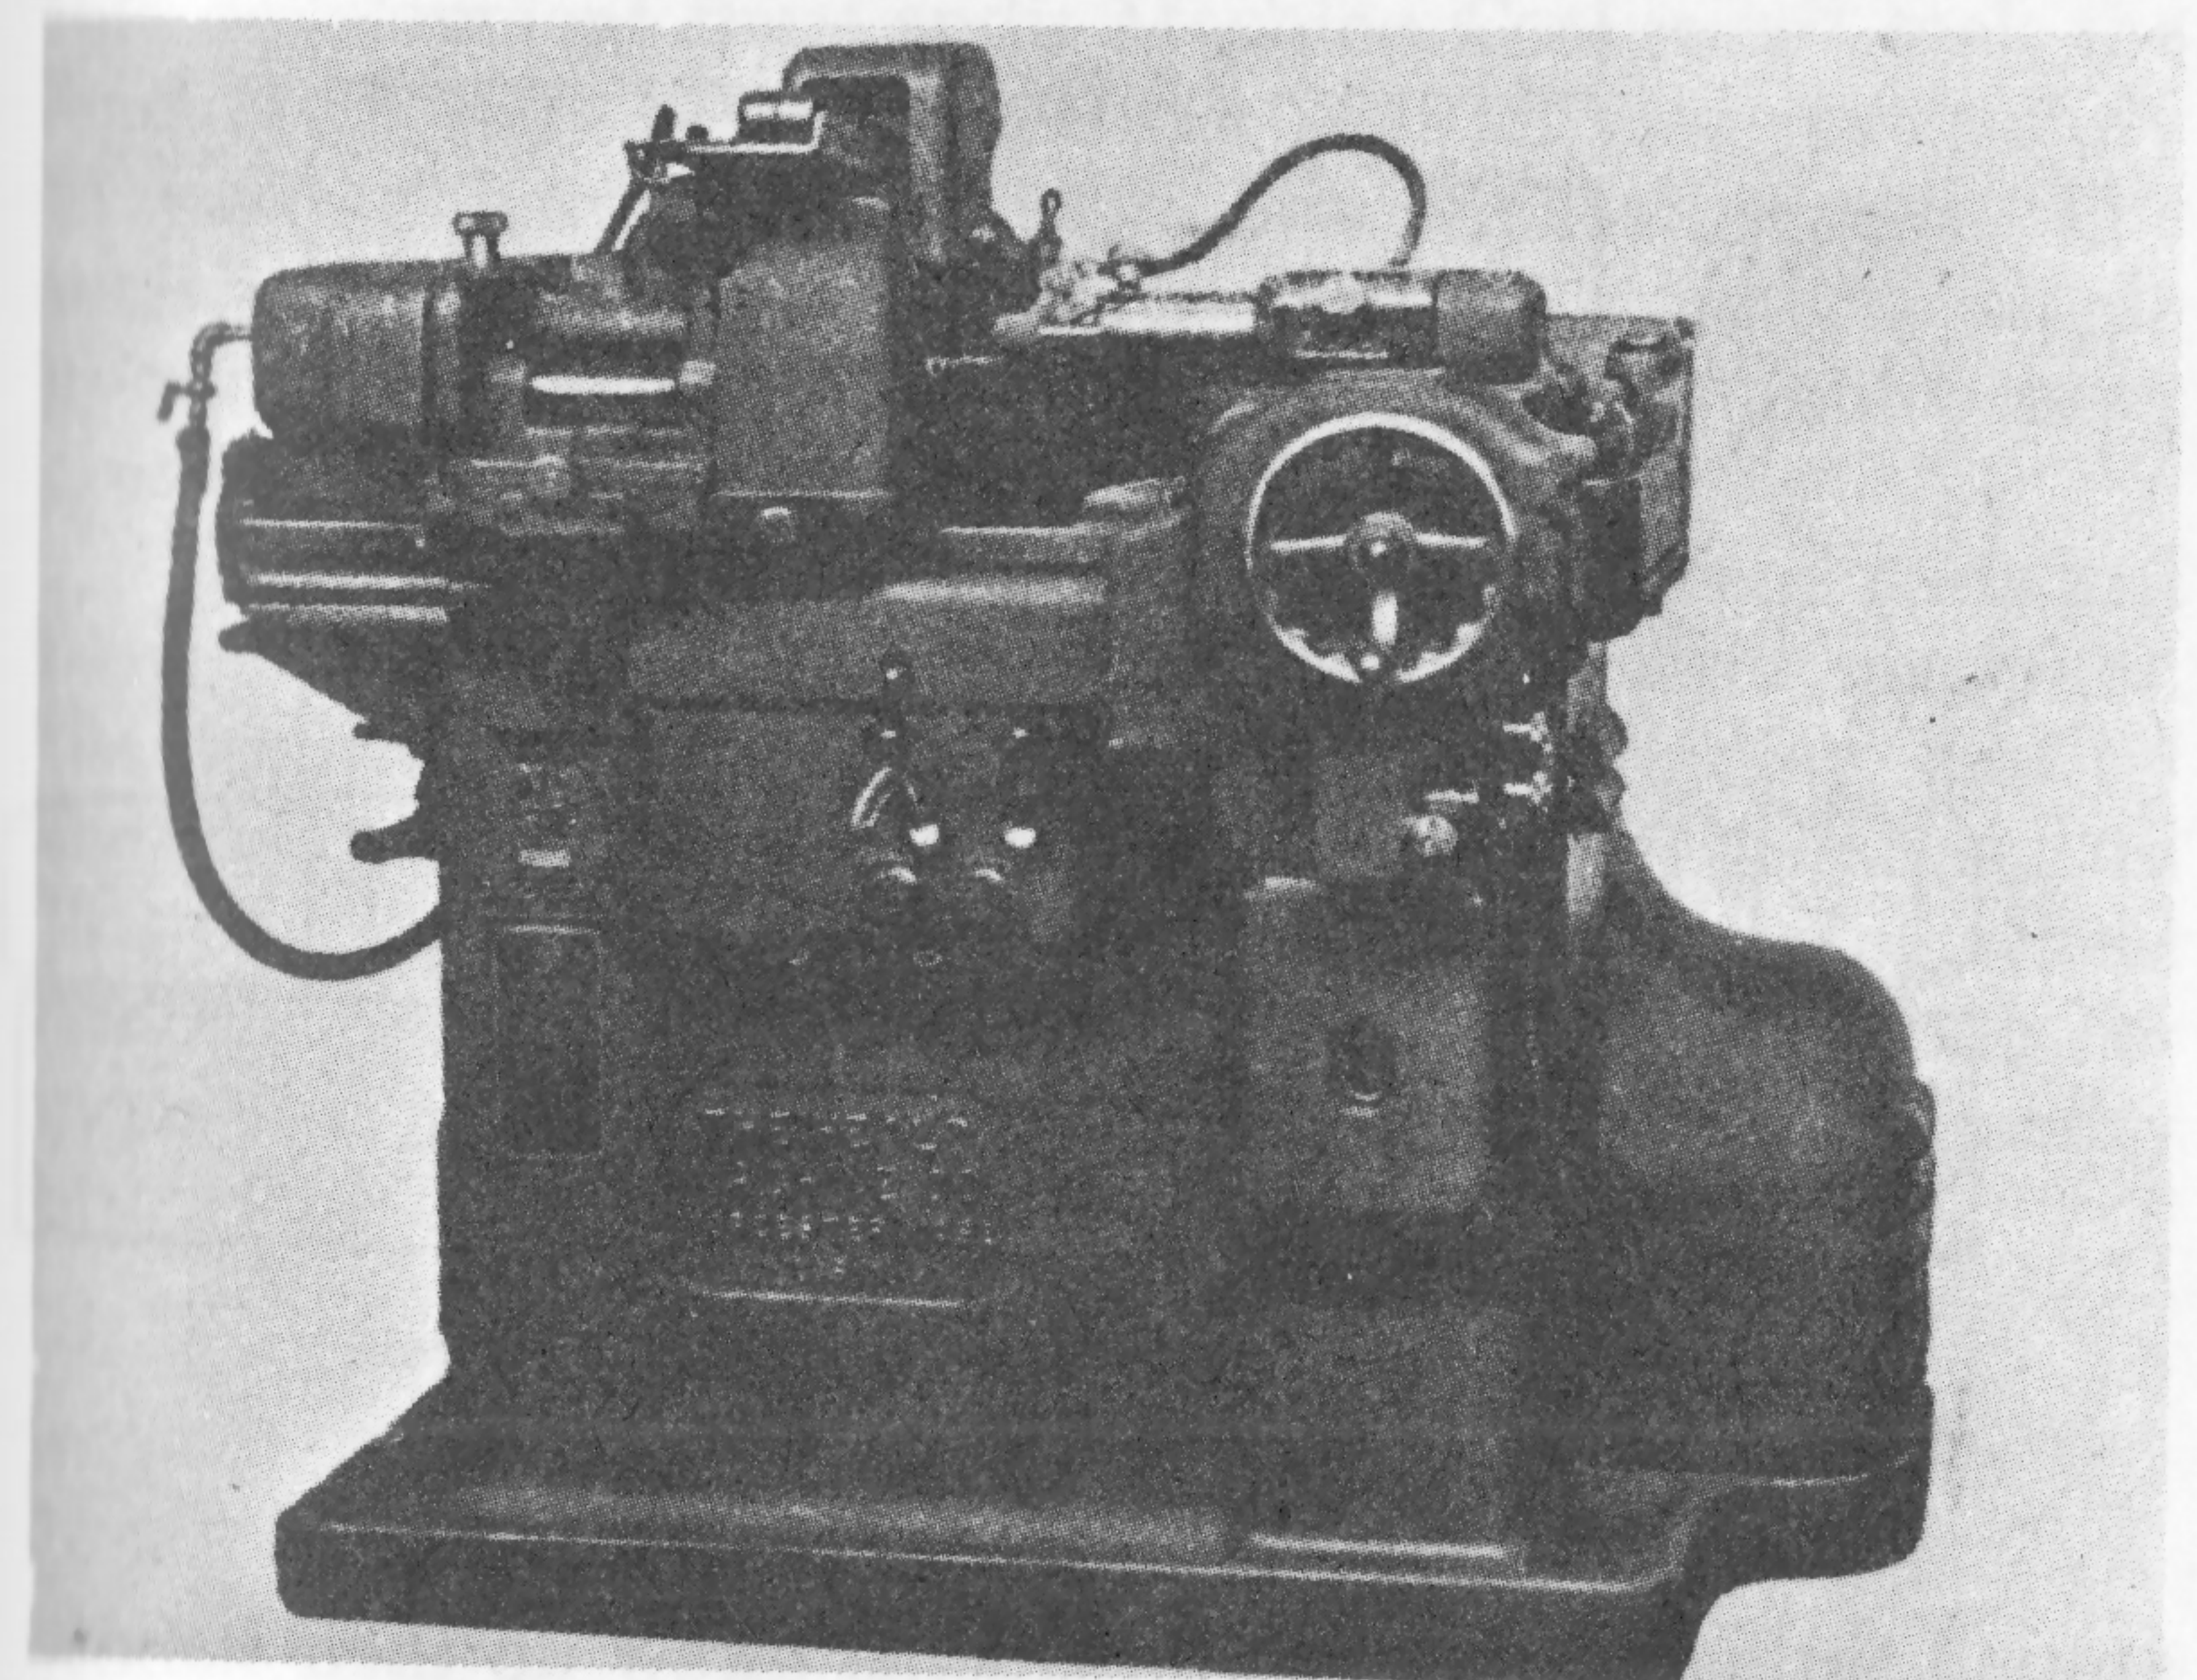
HEALD INTERNAL CENTERLESS GRINDER, 1933 (Heald Company)
